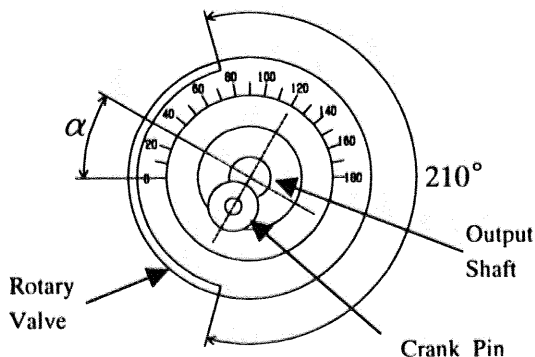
Schematic Illustration of Crank and Rotary Valve (Bottom View)
